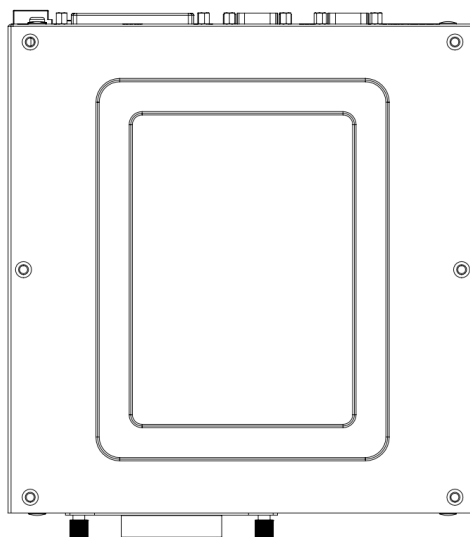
MXC-3300 mechanical dimensions (Bottom view)
